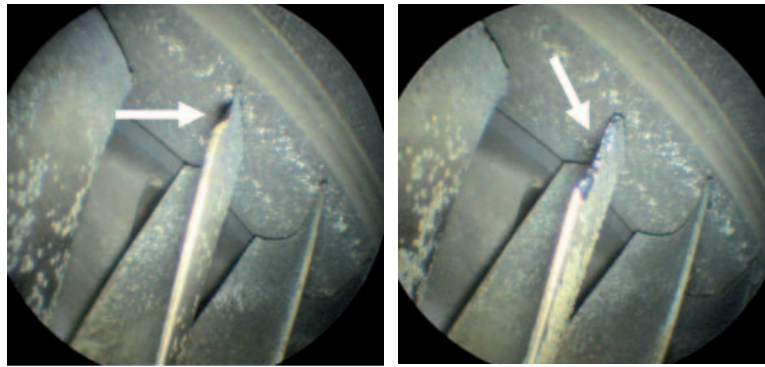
Partly burned high-pressure turbine rotor blade tips
